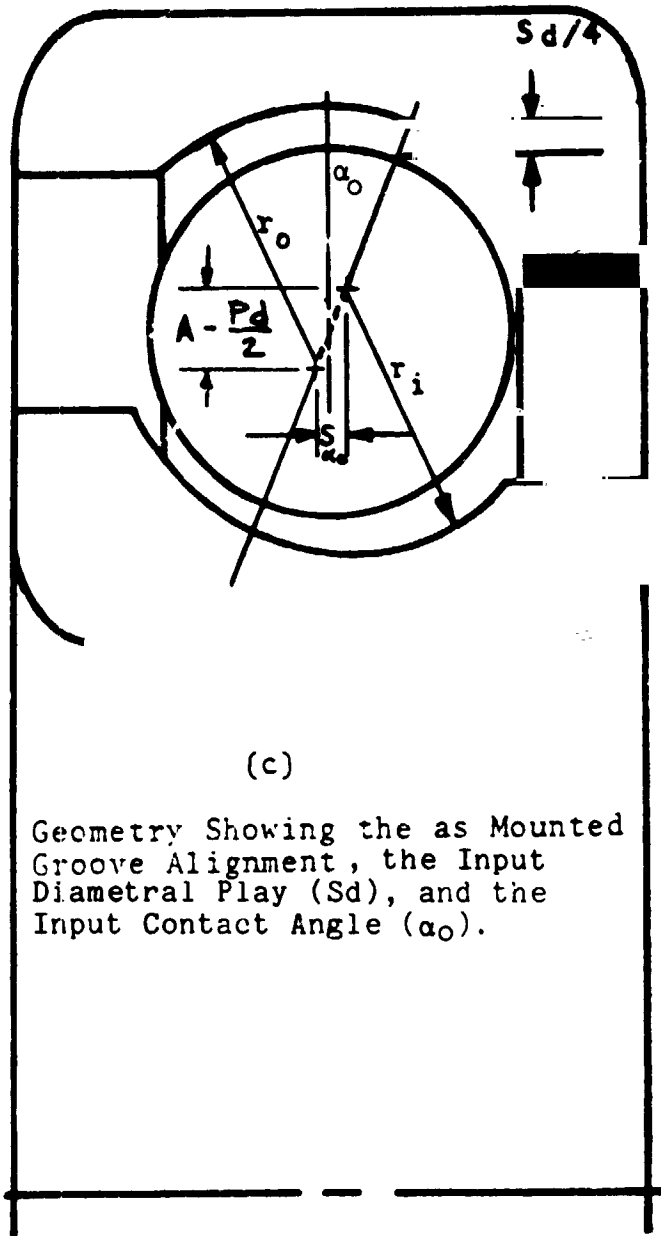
ANGULAR CONTACT BALL BEARING GEOMETRY
